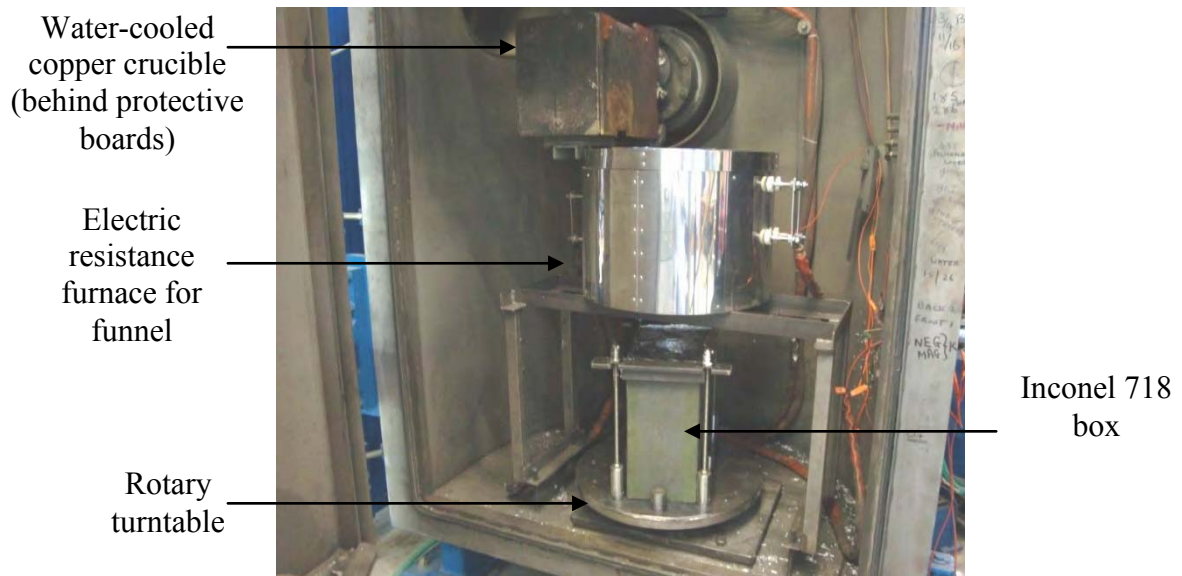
9. Centrifugal casting equipment within the vacuum chamber of the induction skull melting (ISM) furnace.
